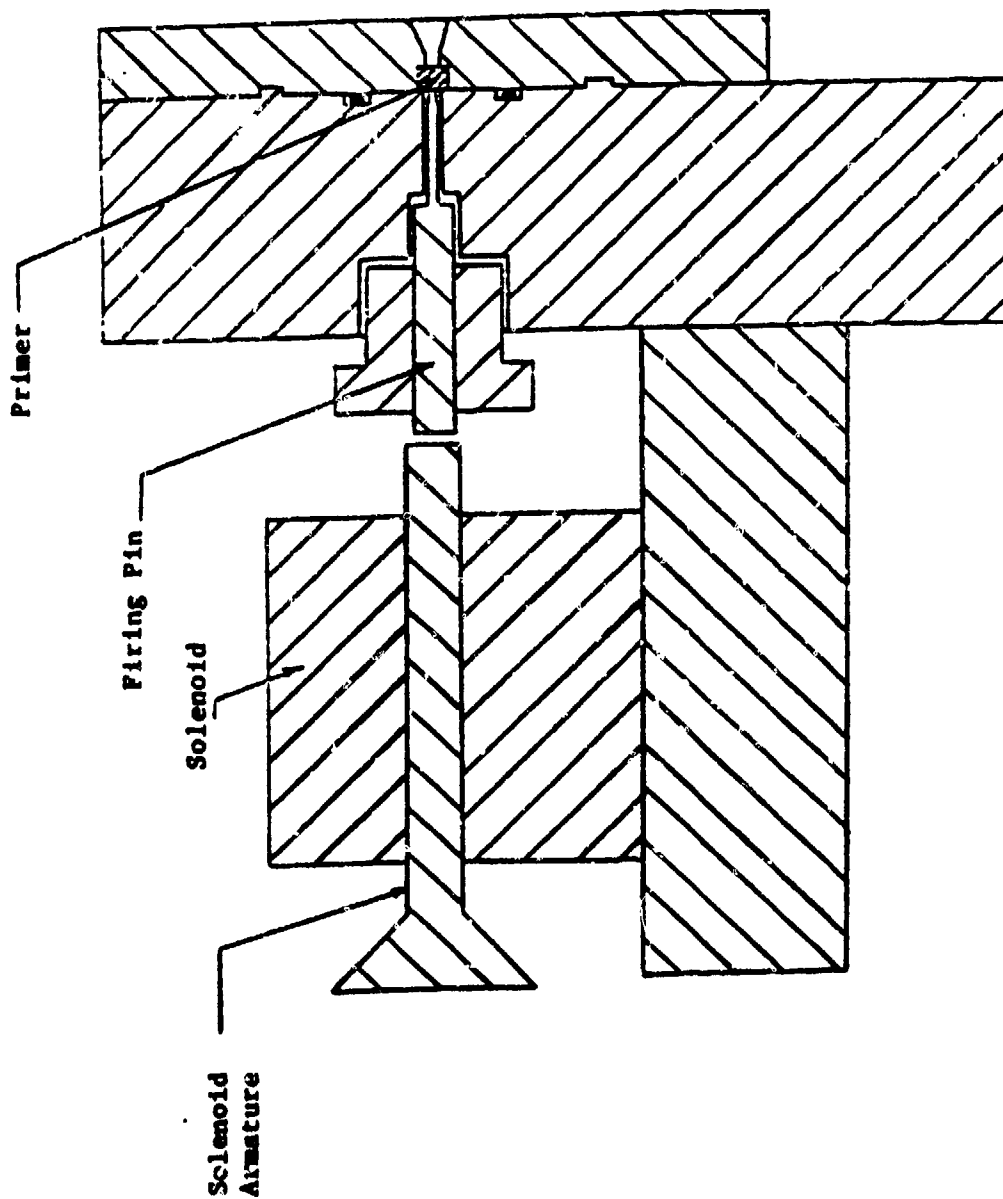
Schematic Drawing of the Impact Primer Ignition System
